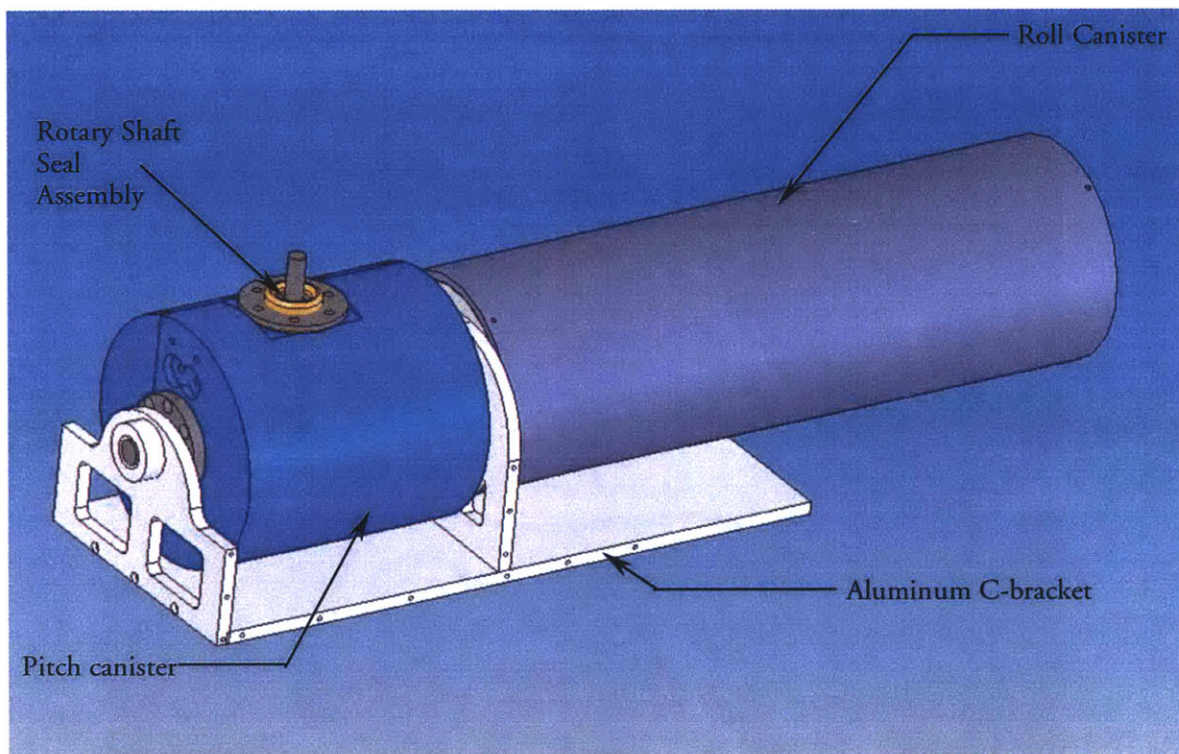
Solidworks drawing of a double-housing foil actuator design
